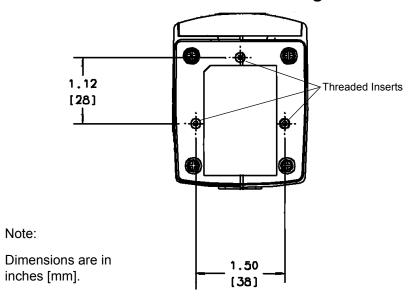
MS 1204FZY/MS 2204/MS 2204VHD Mounting Dimensions
